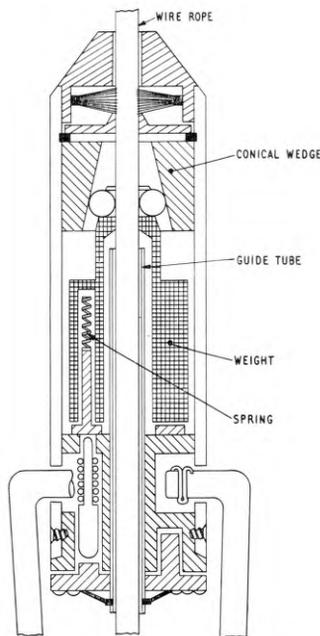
CROSS-SECTION OF EVEREST SAFETY ANCHOR
